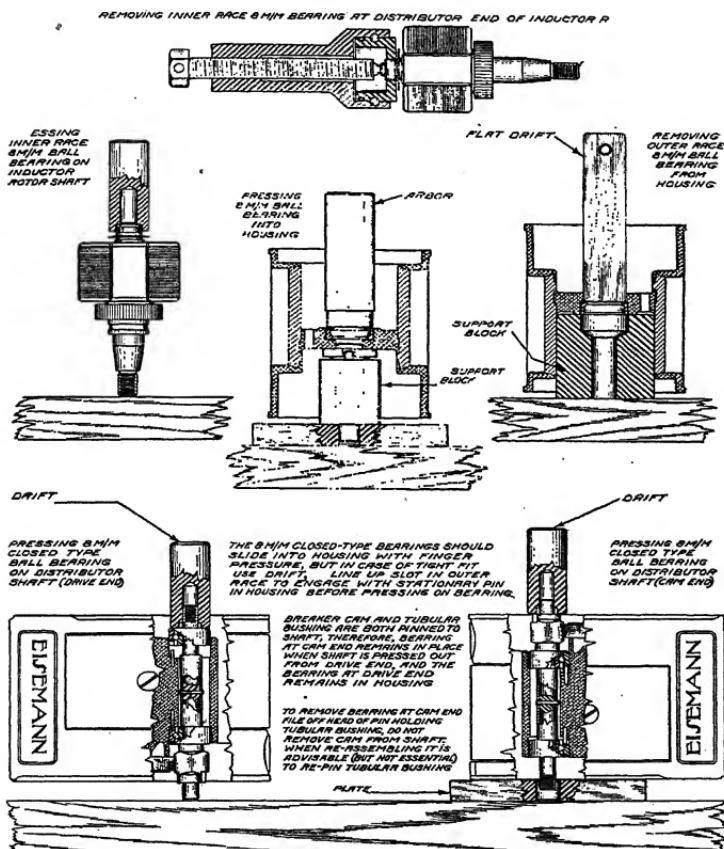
Special Eisemann tools for removing and replacing ball bearings.
